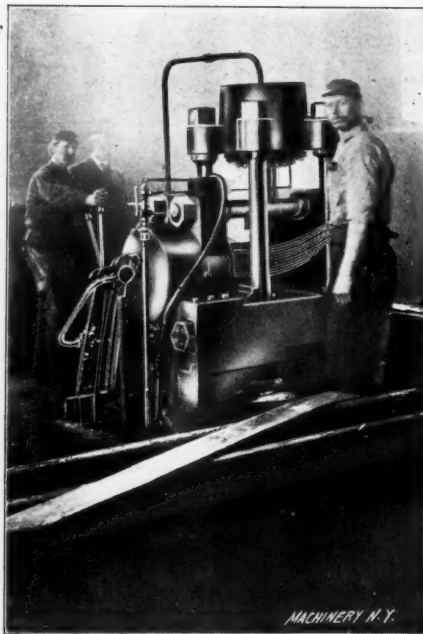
Hydraulic Press which compresses the Band on the Spring while it cools
